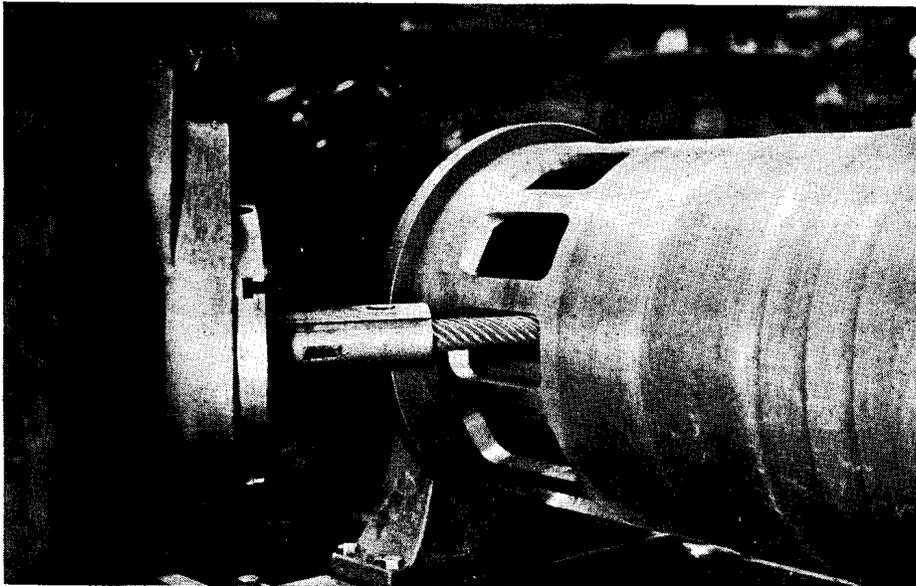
Milling of Ports in Cylinder Liner. (By permission from F. Sass, *Kompressorlose Dieselmotoren*. Copyright, 1929 by Julius Springer in Berlin.)
